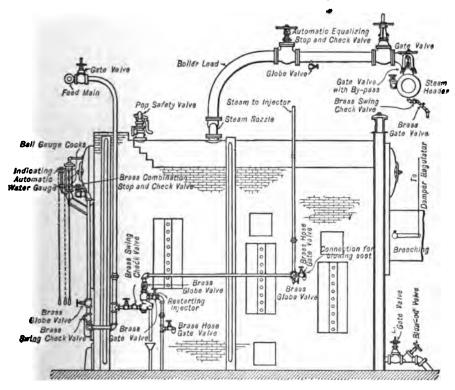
FITTINGS AND CONNECTIONS FOR WATER-TUBE TYPE BOILER.
